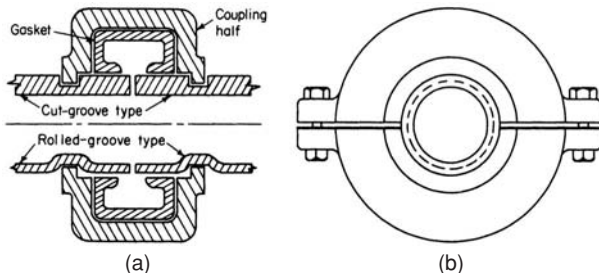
Grooved joint. (a) Section. (b) End view.
